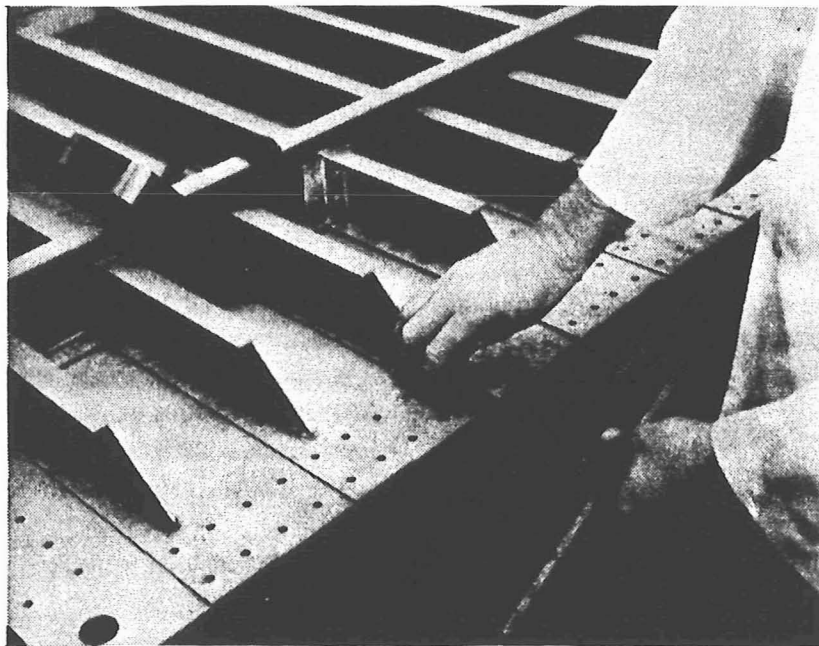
Punching Hole in B/Al Stiffeners During Assembly of Shear Clips (129427B)
